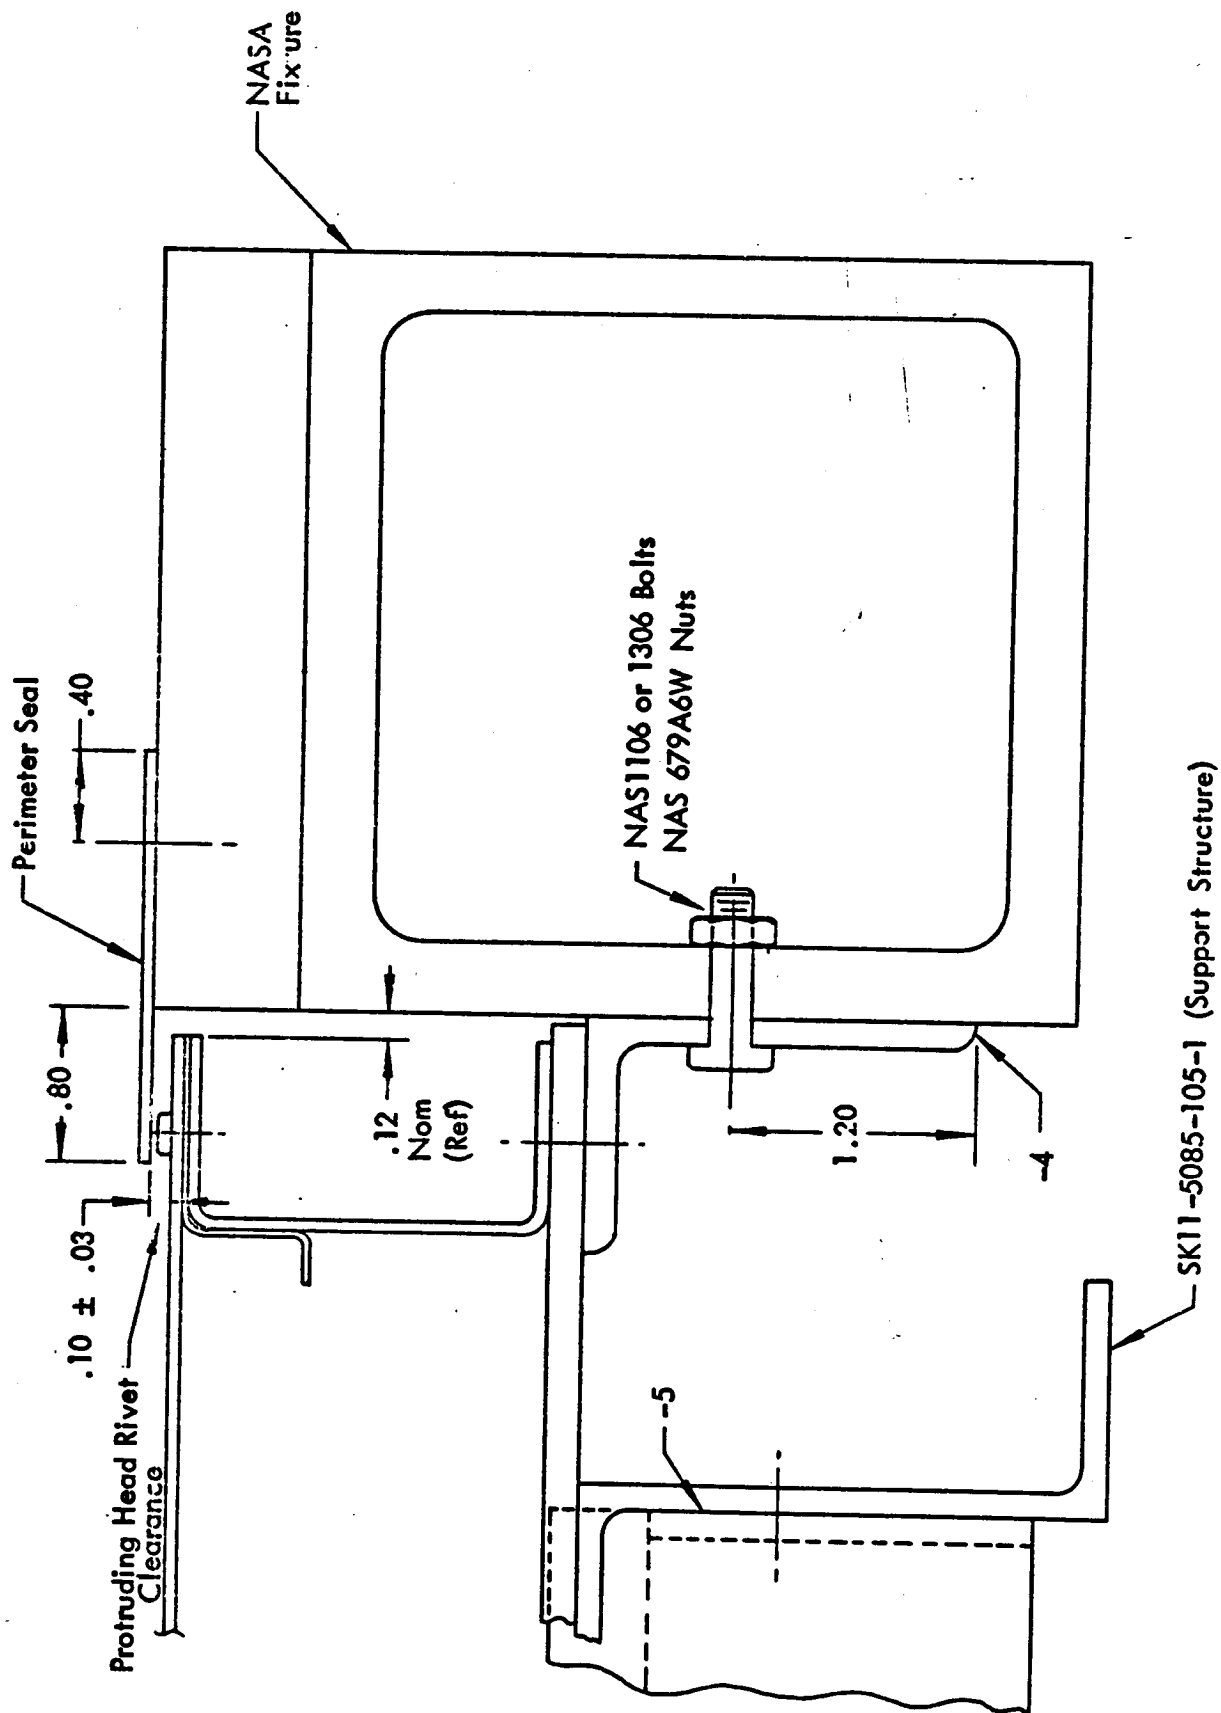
VIEW - SONIC FATIGUE TEST ARRANGEMENT
